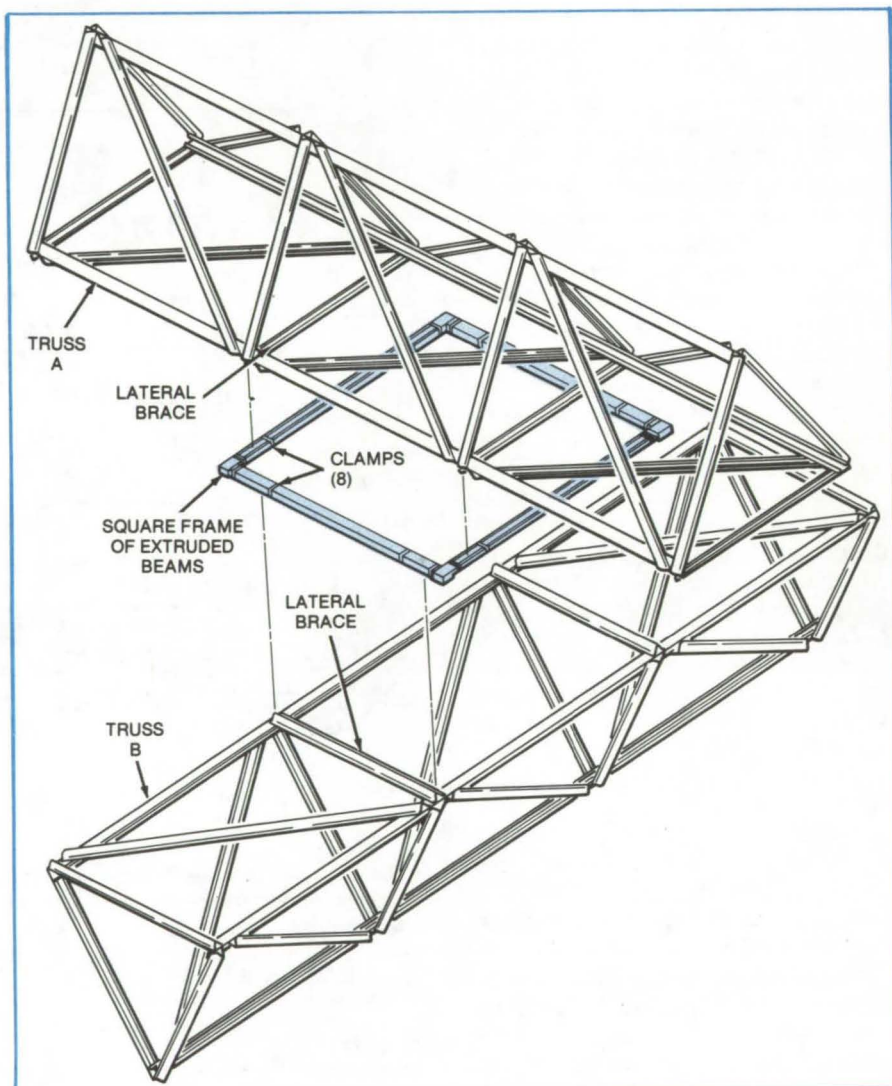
A Square Frame of Extruded Beams holds truss A to truss B. The extruded beams nest on lateral braces on each truss.
